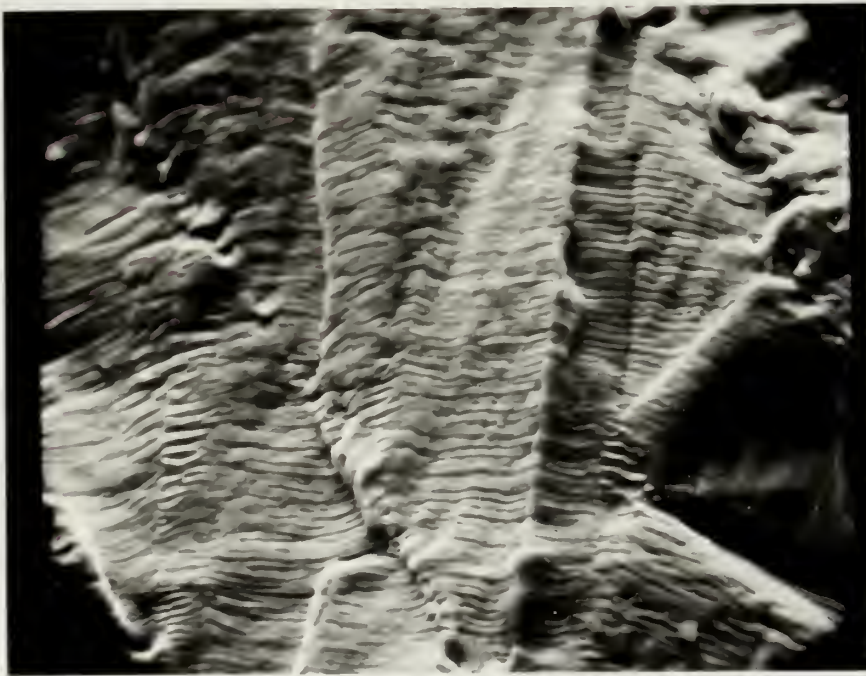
Inconel 625 plate fatigue fracture surface. 2680X.
